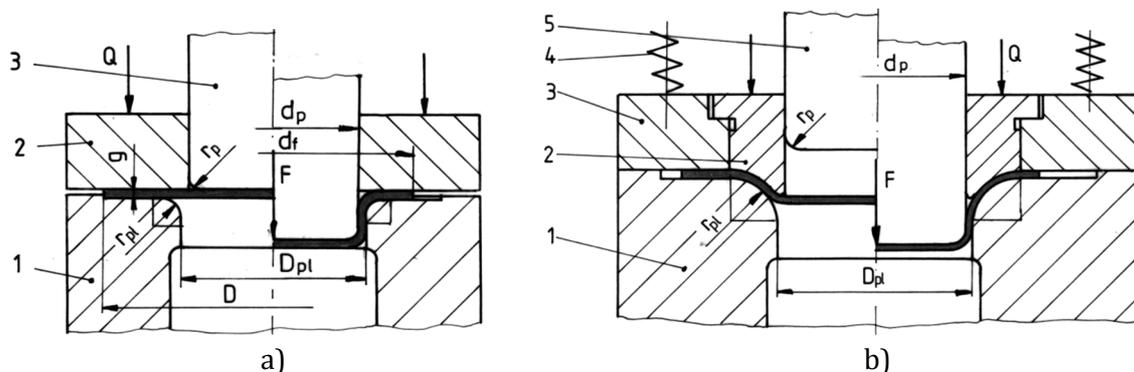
Deep drawing dies with: a) - plane blank holding; b) - combined blank holding
